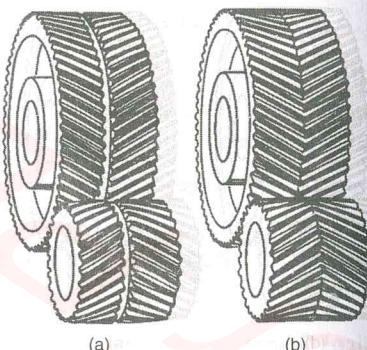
(a) Double Helical Gearing with Two Pairs of Opposed Gears, (b) Herringbone Gears Having Opposed Teeth Joined in the Middle
